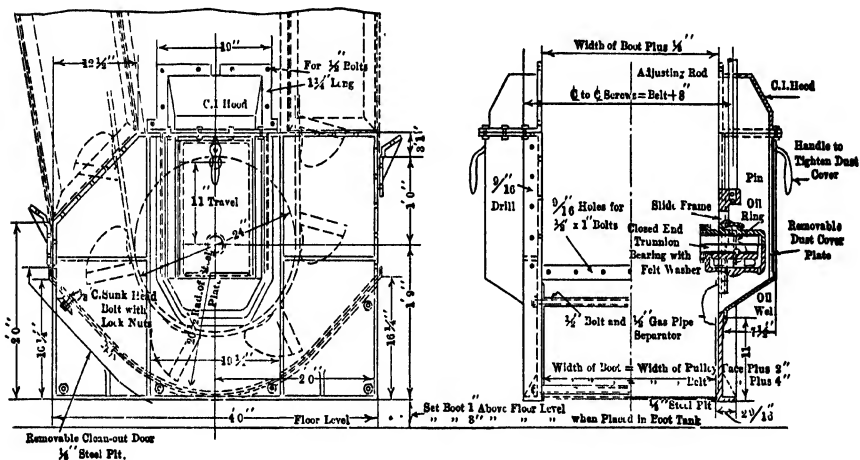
Heavy Cast-iron Grain Boot Used with Steel Casing.
